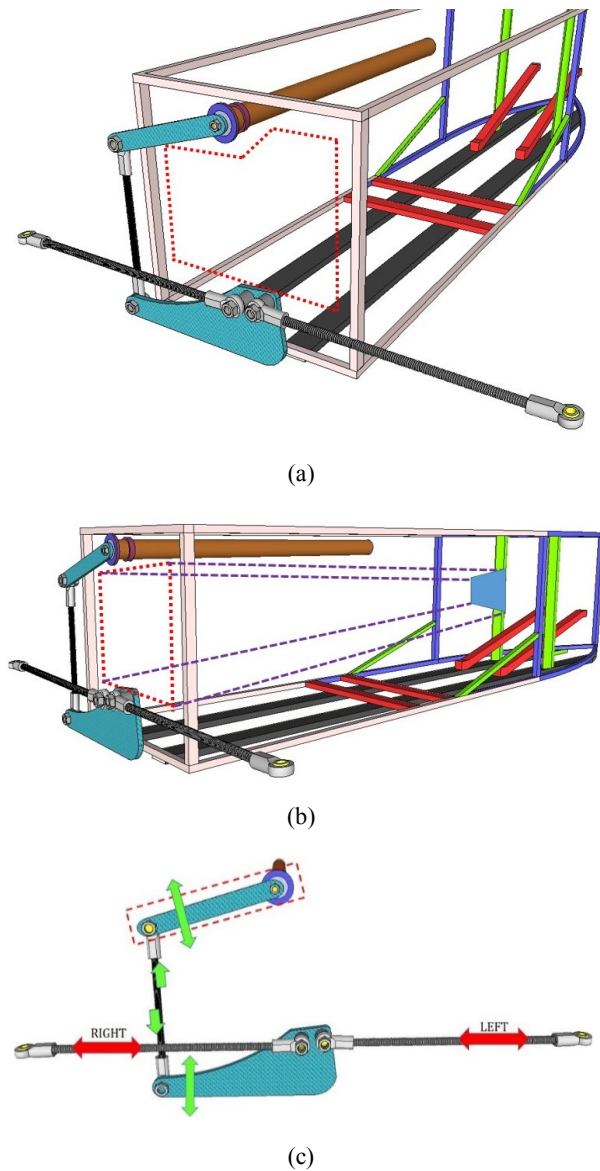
The adopted steering mechanism. (a) Viewing space (RED DOT) from the top front view; (b) View (RED and VIOLET DOT) from the sitting position of the driver ; (c) the working mechanism of the steering system
